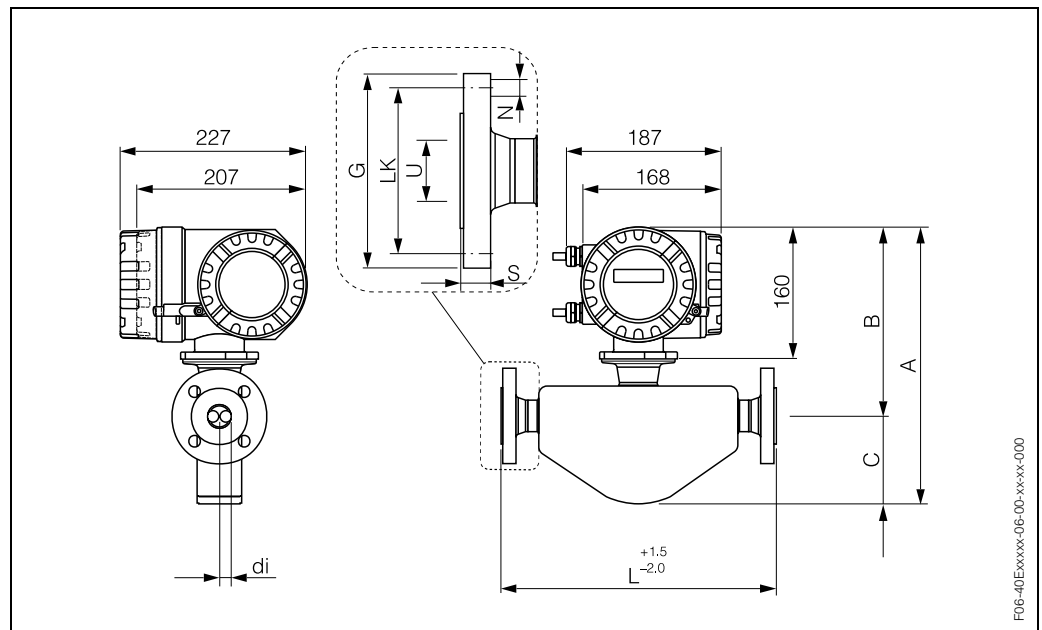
Dimensions Promass E: flange connections (DIN, ANSI, JIS)
